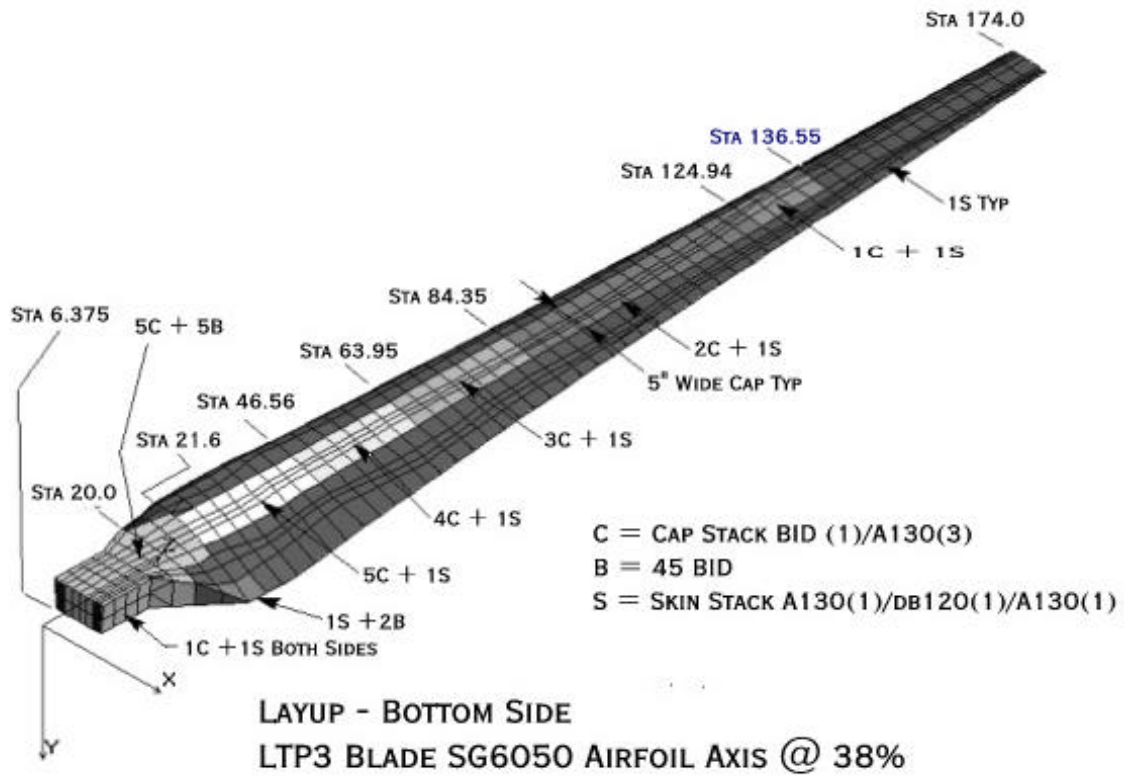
Final Design Lay up – ISO Bottom View
